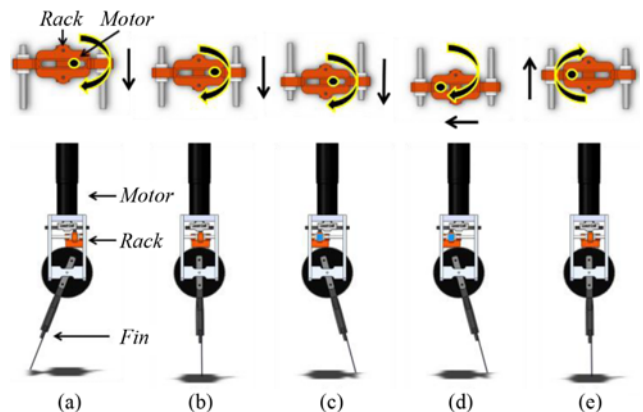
Schematic drawing of the Scotch yoke mechanism: the top is the motion of the rack, and the bottom is the movement of the tail fin when (a) the rack is in the top, (b) the rack moves to the bottom, (c) rack is in the bottom, (d) the rack changes direction, and (e) the rack moves to the top
